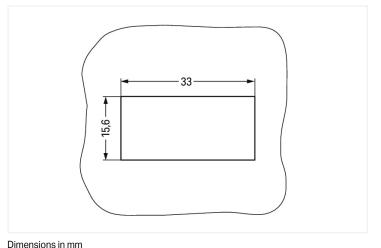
Plate thickness: 0.5 ... 2 mm Cutout tolerance: + 0.1 mm
